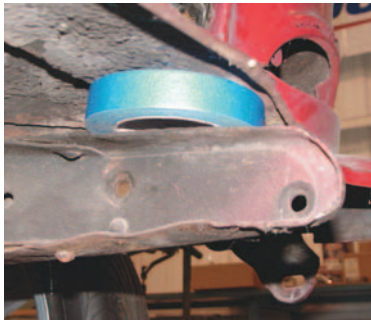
The radiator core support also holds the front fenders in place. The fenders MUST be supported before the core support is removed or paint damage may occur. We found slipping a roll of 3/4" masking tape between the splash pan and the top of the frame supported the front fenders perfectly.
